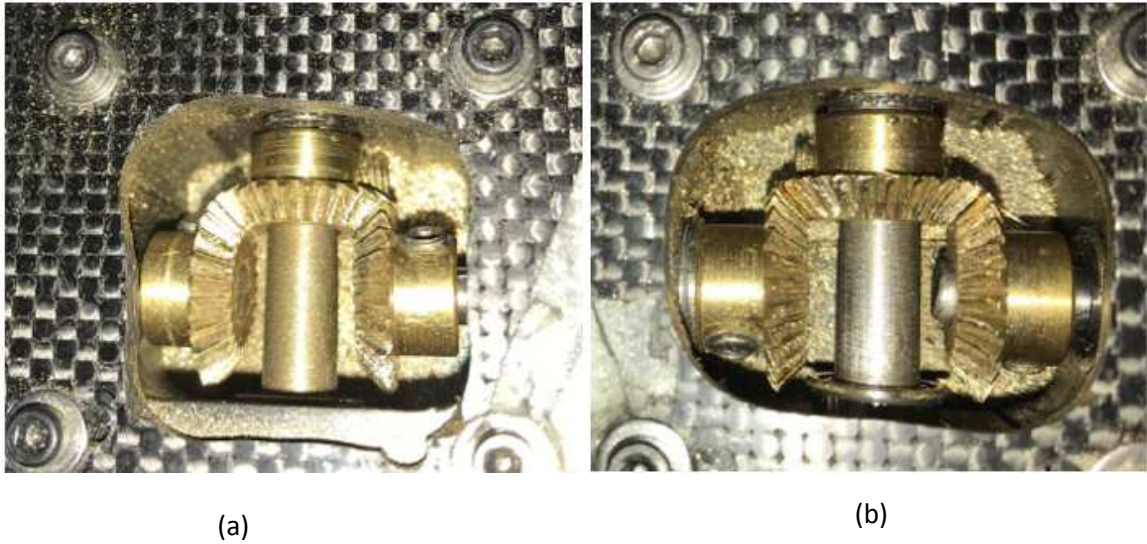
and 6.22b: (a) The front gearbox shows excessive teeth wear after the test. (b) The back gearbox shows the excessive teeth wear on the bevel gear after the test.
